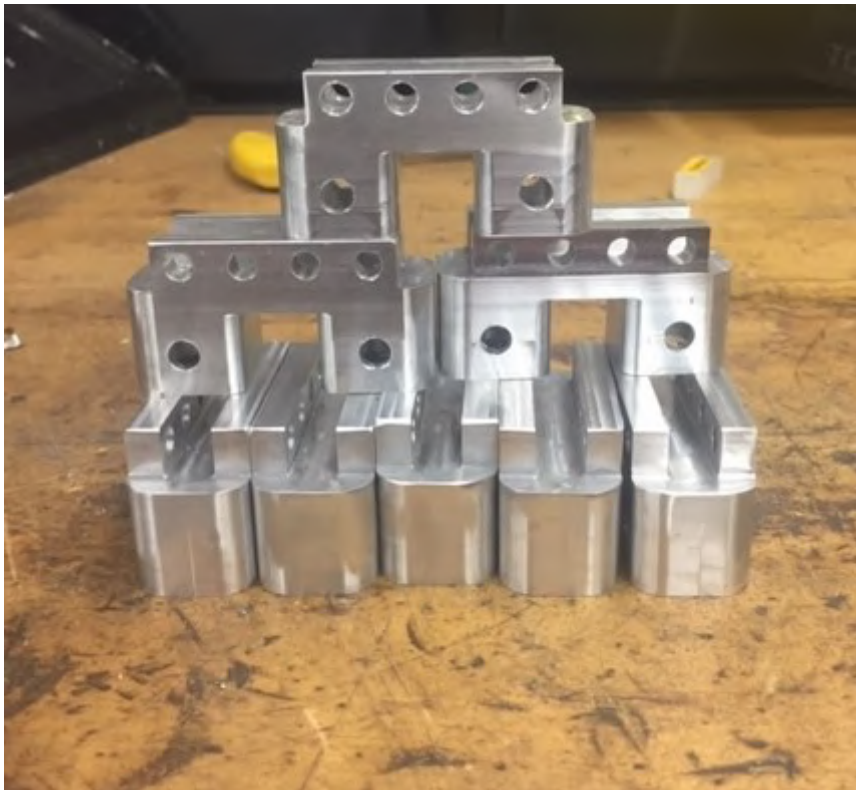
End Caps coupling the joints to the cylindrical tubes
